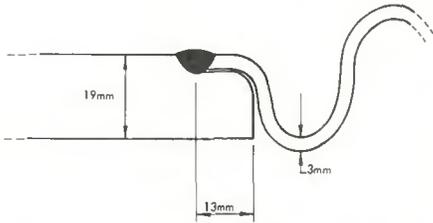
Detail of weld in Berkeley bellows joint in which fatigue cracking occurs (Ref. 29)
